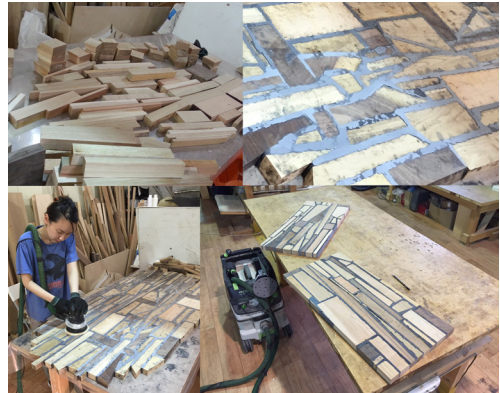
Working Process, Selection, Fabrication, Trimming, Sawing.
